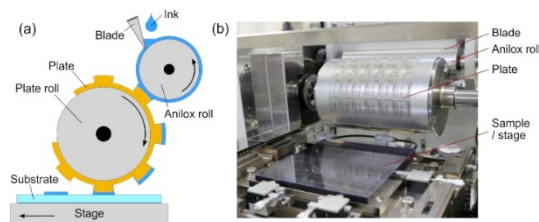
Flexography for high-throughput printing fabrication of CNT TFTs.
